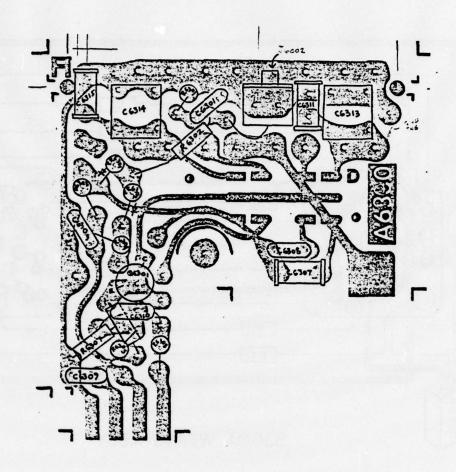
P.C. BOARD LAYOUT FOR THE A6300A TRANSMITTER MASTER OSCILLATOR ASSEMBLY (FRONT SIDE)
